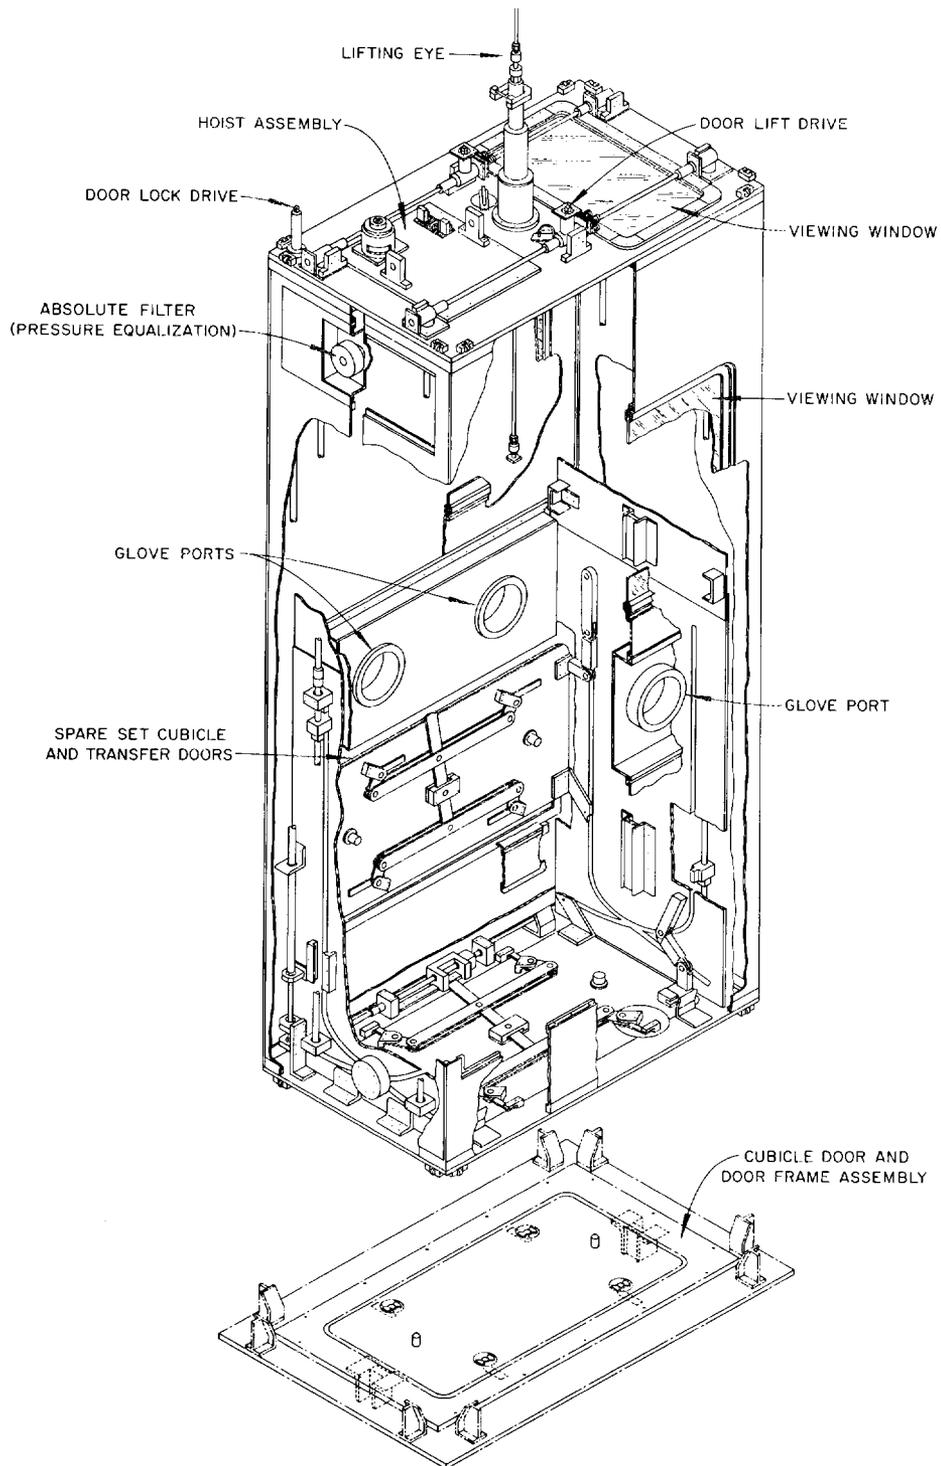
Cutaway View of Equipment Transfer Case. The shield is not shown.
